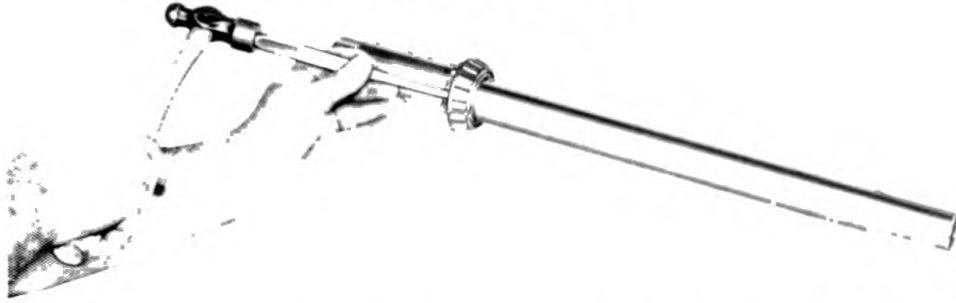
Retainer and Shims Removed from Rear Pinion Bearing
